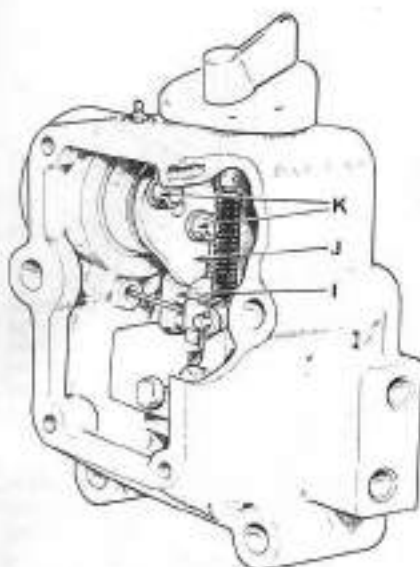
Adjusting rocker shaft cam; refer to text for adjustment procedure and specifications.
